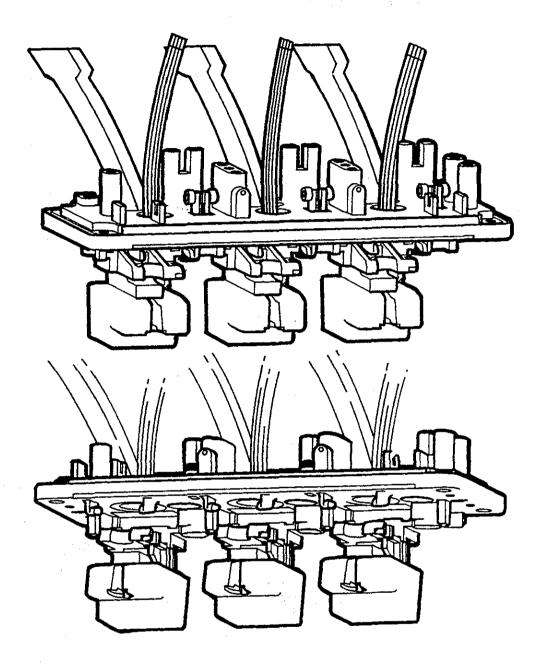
Die Cast Chassis with Sleeve Bearings (Model 2863)
